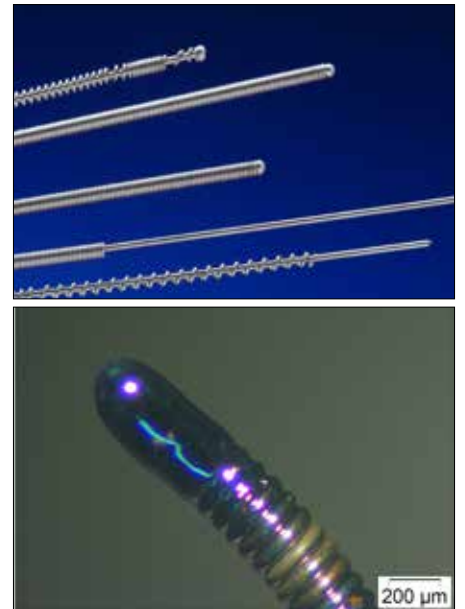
Laser beam welding of neurovascular coils using a double pulse from a diode laser. (Courtesy Fraunhofer ILT)
